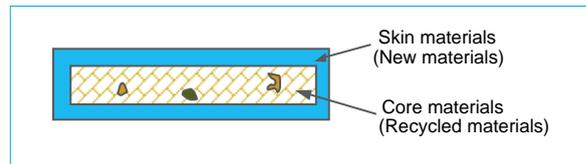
Cross-sectional schematic drawing of sandwich molding
